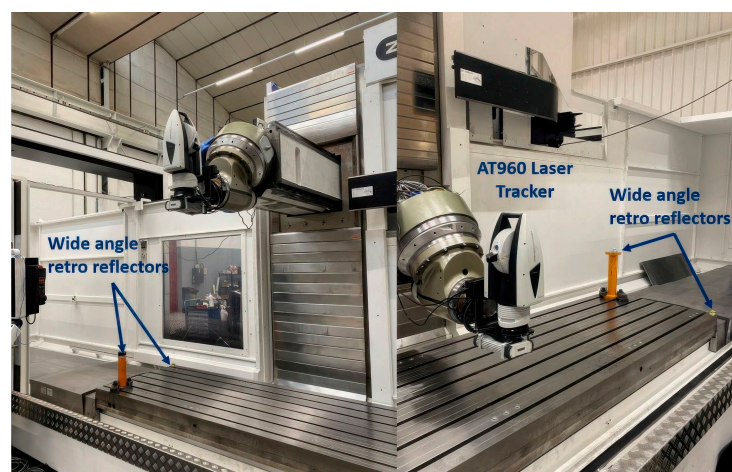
Wide-angle reflectors' disposition for the ZERO™ Zayer machine tool.
